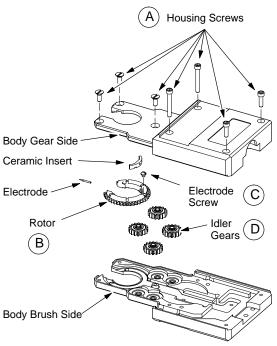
Removing Series 8 Micro Weld Head Components for Cleaning
